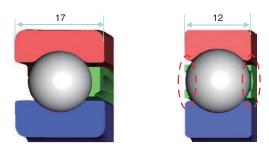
Conventional bearing Fig. 7-2 Slim bearing (Bearing no. 6207)
